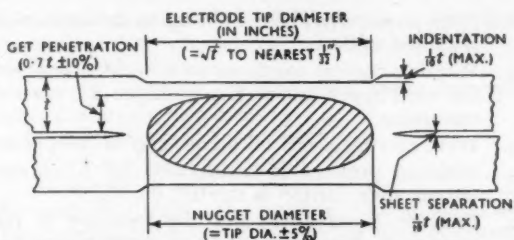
Standard spot weld dimensions (B.W.R.A.).
